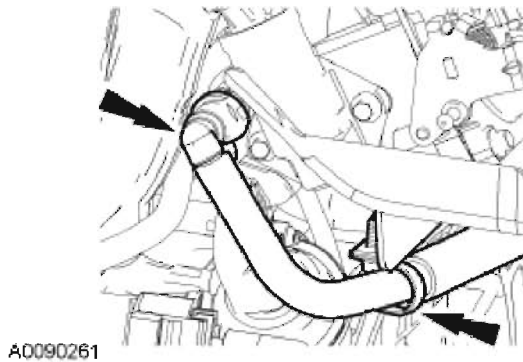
Locating Power Steering Tube & Bracket Aside
